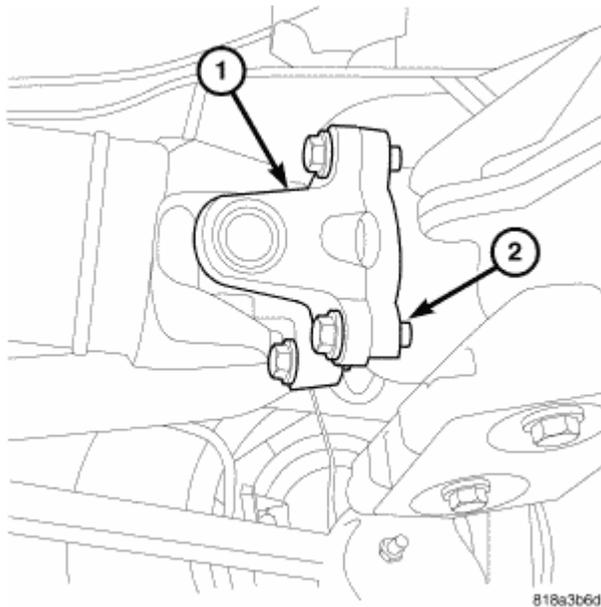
Identifying Propeller Shaft Flange & Axle Flange
